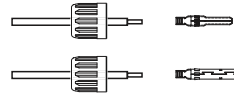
Insert the wire into the connector cap nut and contact pin
